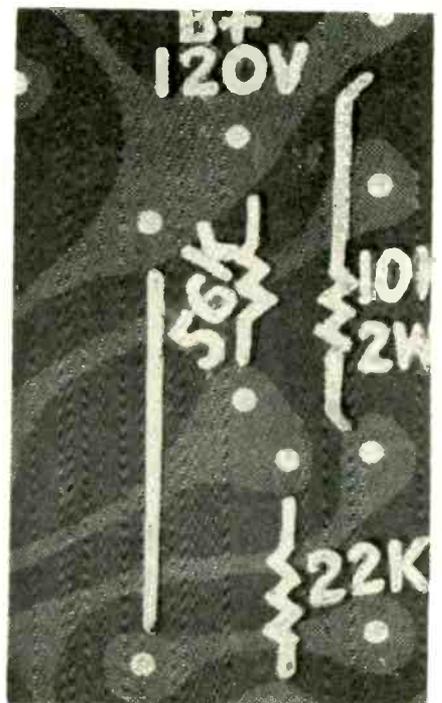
Easy to check tube pins are identified by Westinghouse "See-Matic" board.
